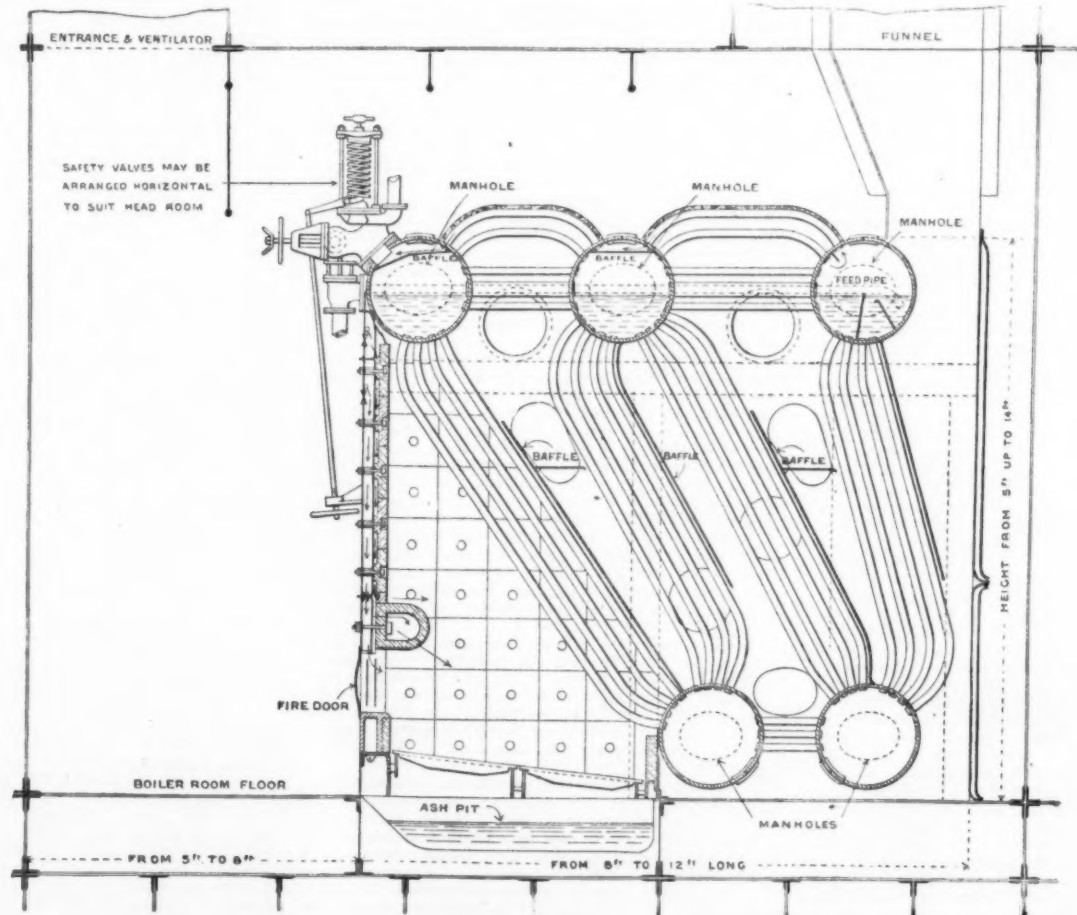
STIRLING BOILER. FIVE DRUM TYPE.
